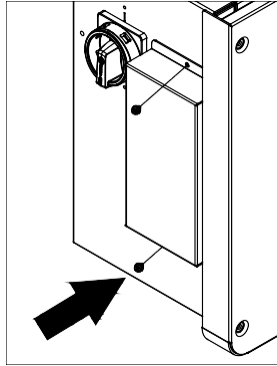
Attach the Cover to the left side of the Wiring Box
